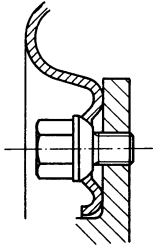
Depression design with special springing characteristics on a passenger car sheet metal disc-type wheel. The wheel can be centred using the fixing bolts or by fitting into the tolerated hole (Fig. 2.24).
